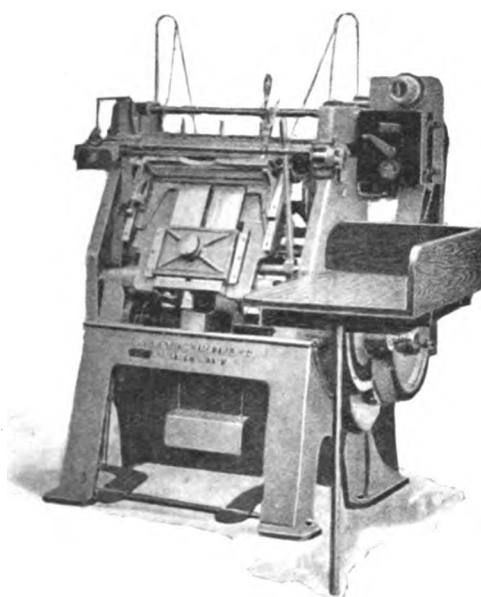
OVERSEWING MACHINE FOR BOOK SEWING
